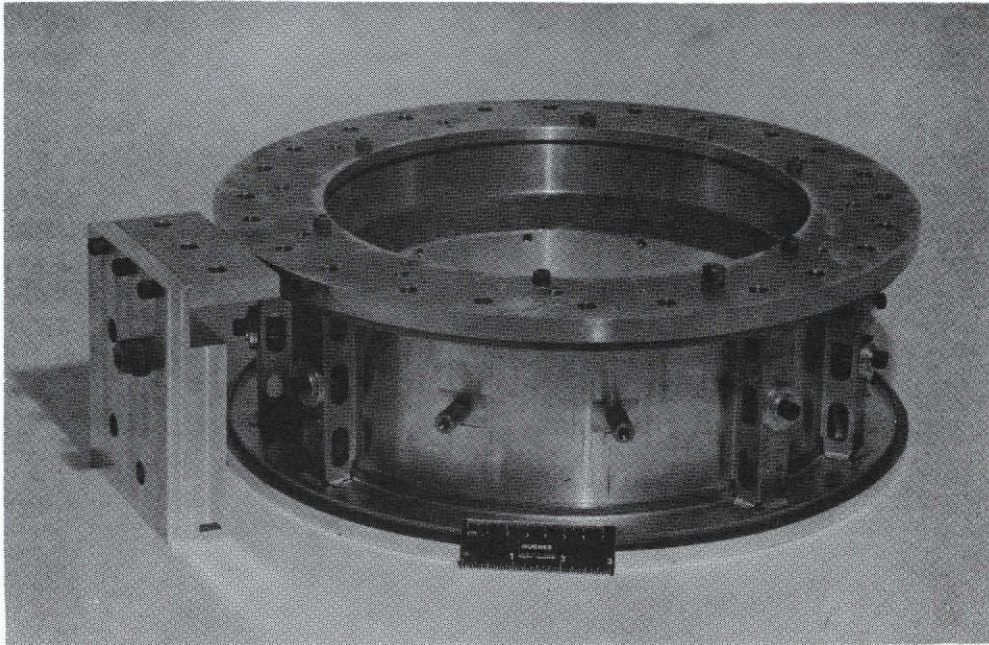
Thruster shell structure welding and drilling fixtures.
